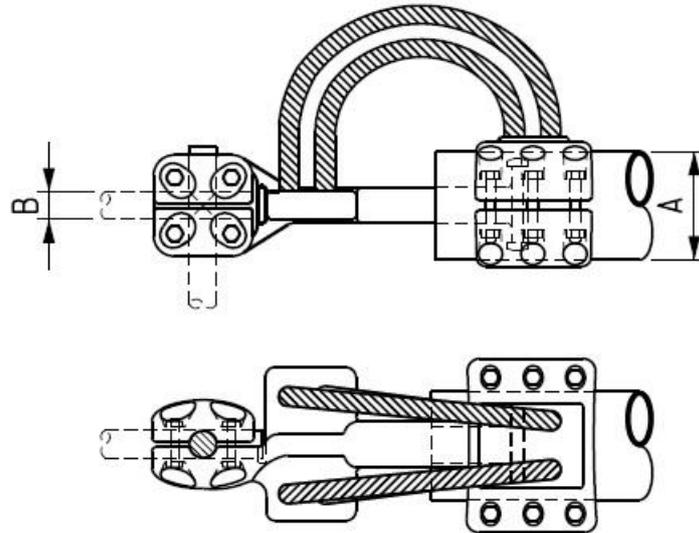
EEC-H/VS-TB: Expansion Clamp – Horizontal/Vertical Stem – Tube Connection – Equipment Mounted
